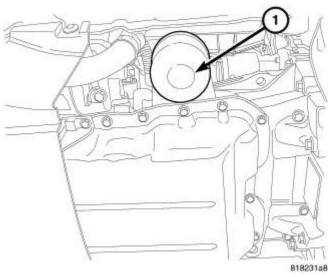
Oil Filter Courtesy of CHRYSLER GROUP, LLC
